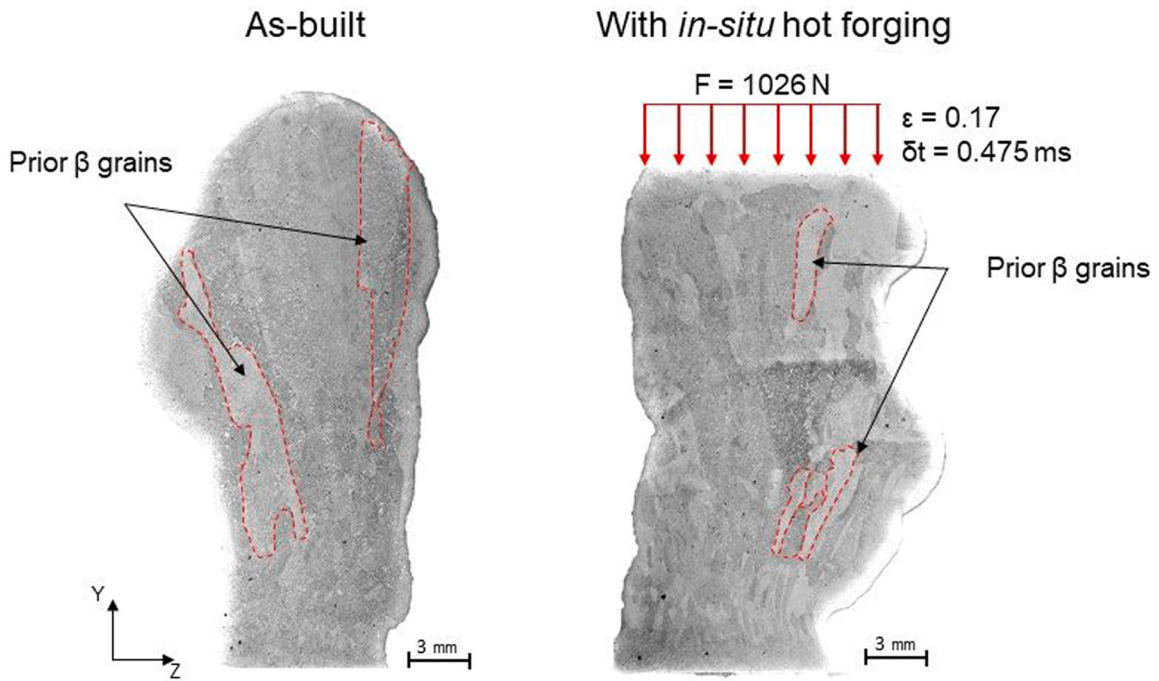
Macrographs of parts built without and with hot forging showing the geometrical features.
